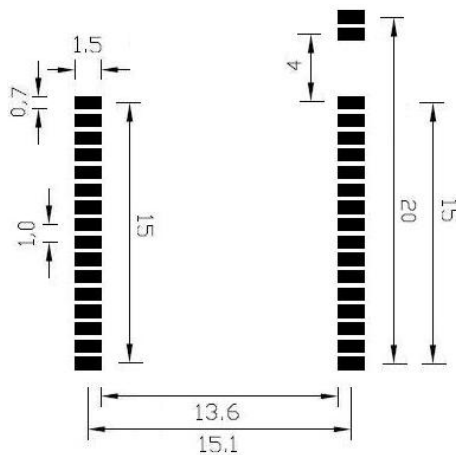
HPTZ01P-U0 module Recommended PCB footprint, Top View
